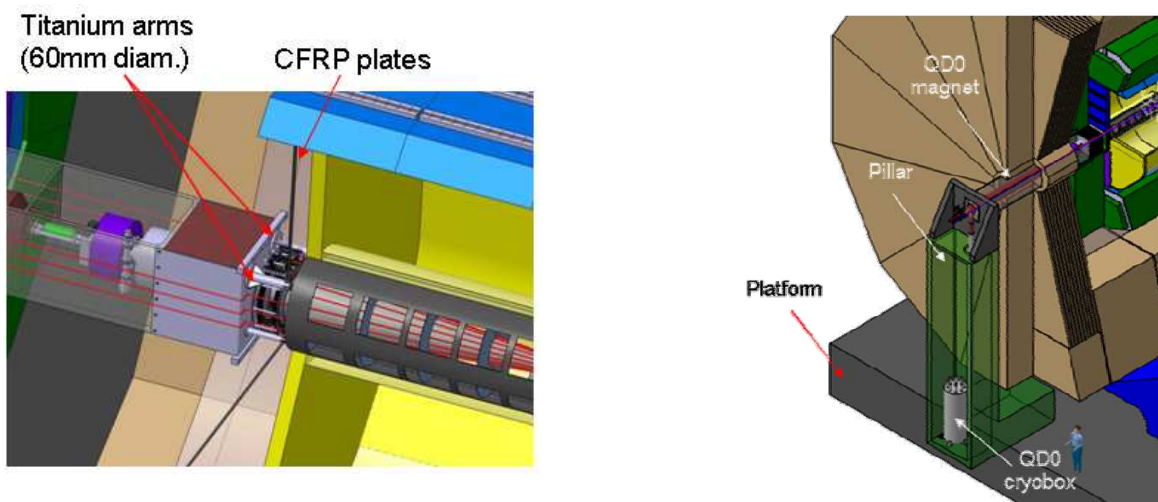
Details on CFRP tension plates and pillar
